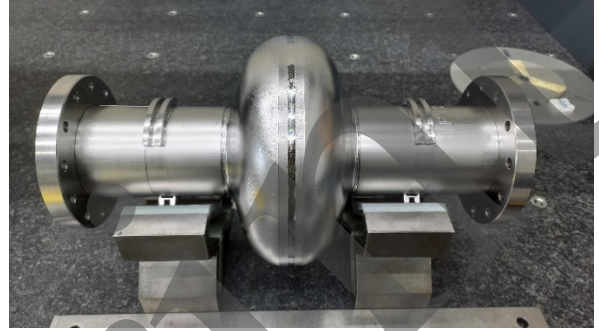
Single cell cavity during dimensional control after mechanical fabrication at RI.
